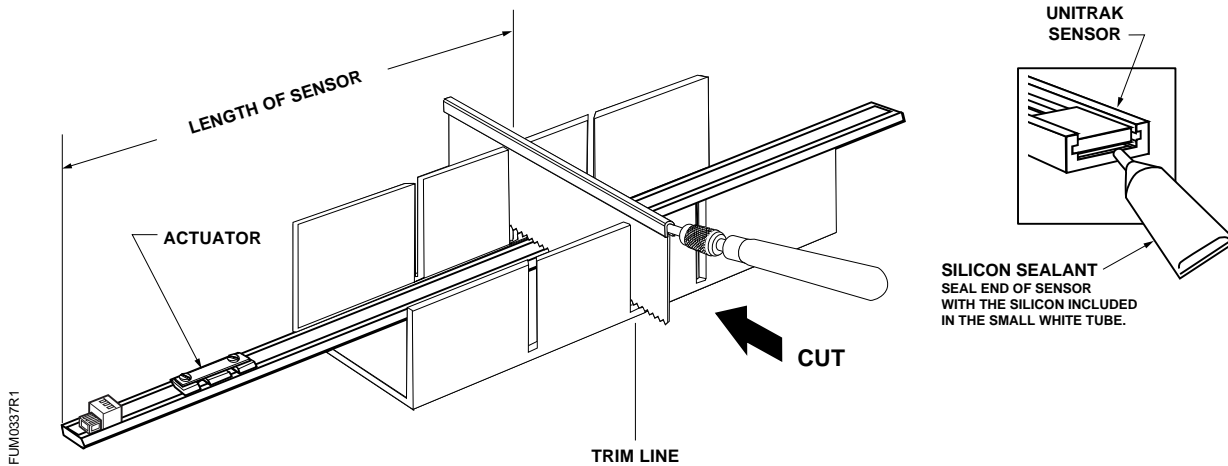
Cutting UniTrak Sensor Using the Trim Tool Kit.
